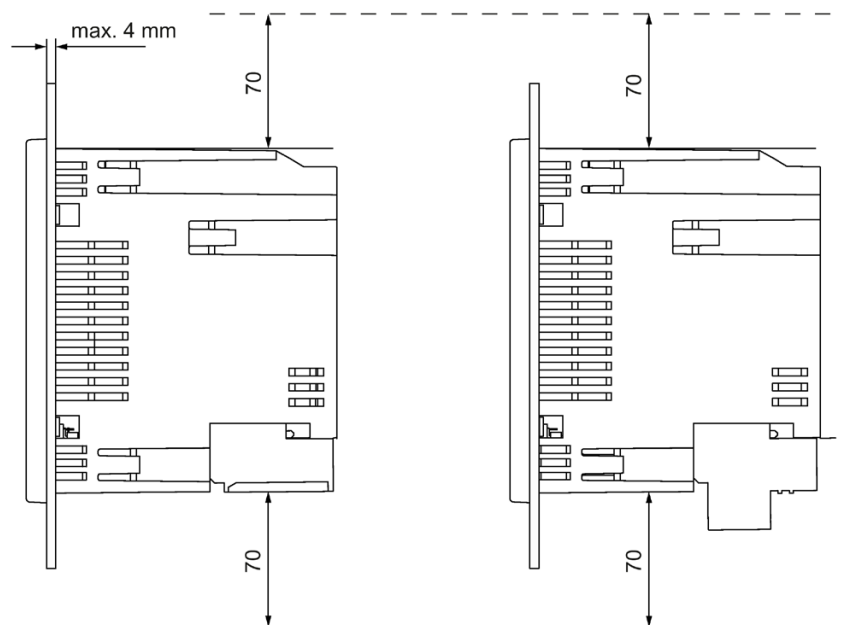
Clearances, device with screw terminal (on the left), device with ring lug terminal (on the right)
